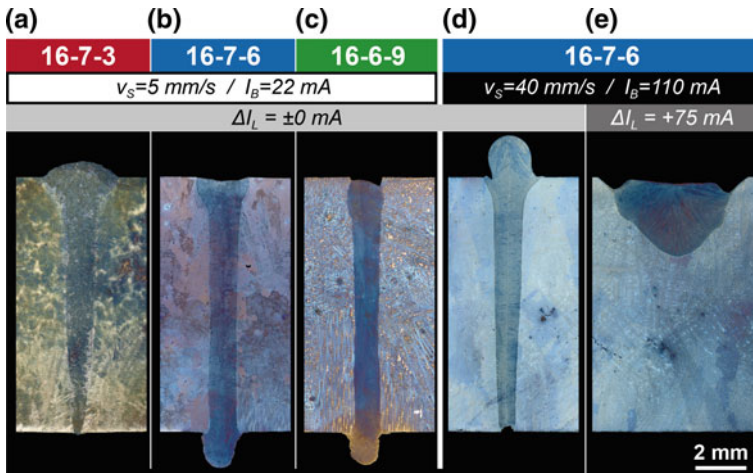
Macroscopic appearance of the welding seam dependent on the welding speed, the base material and the focal plane
